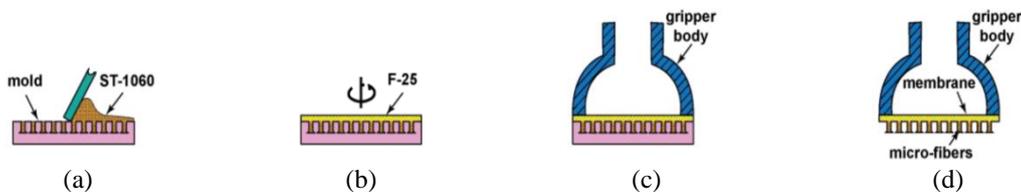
(a) molding, (b) spin-coating the membrane, (c) mounting gripper body and (d) GeckoGripper
